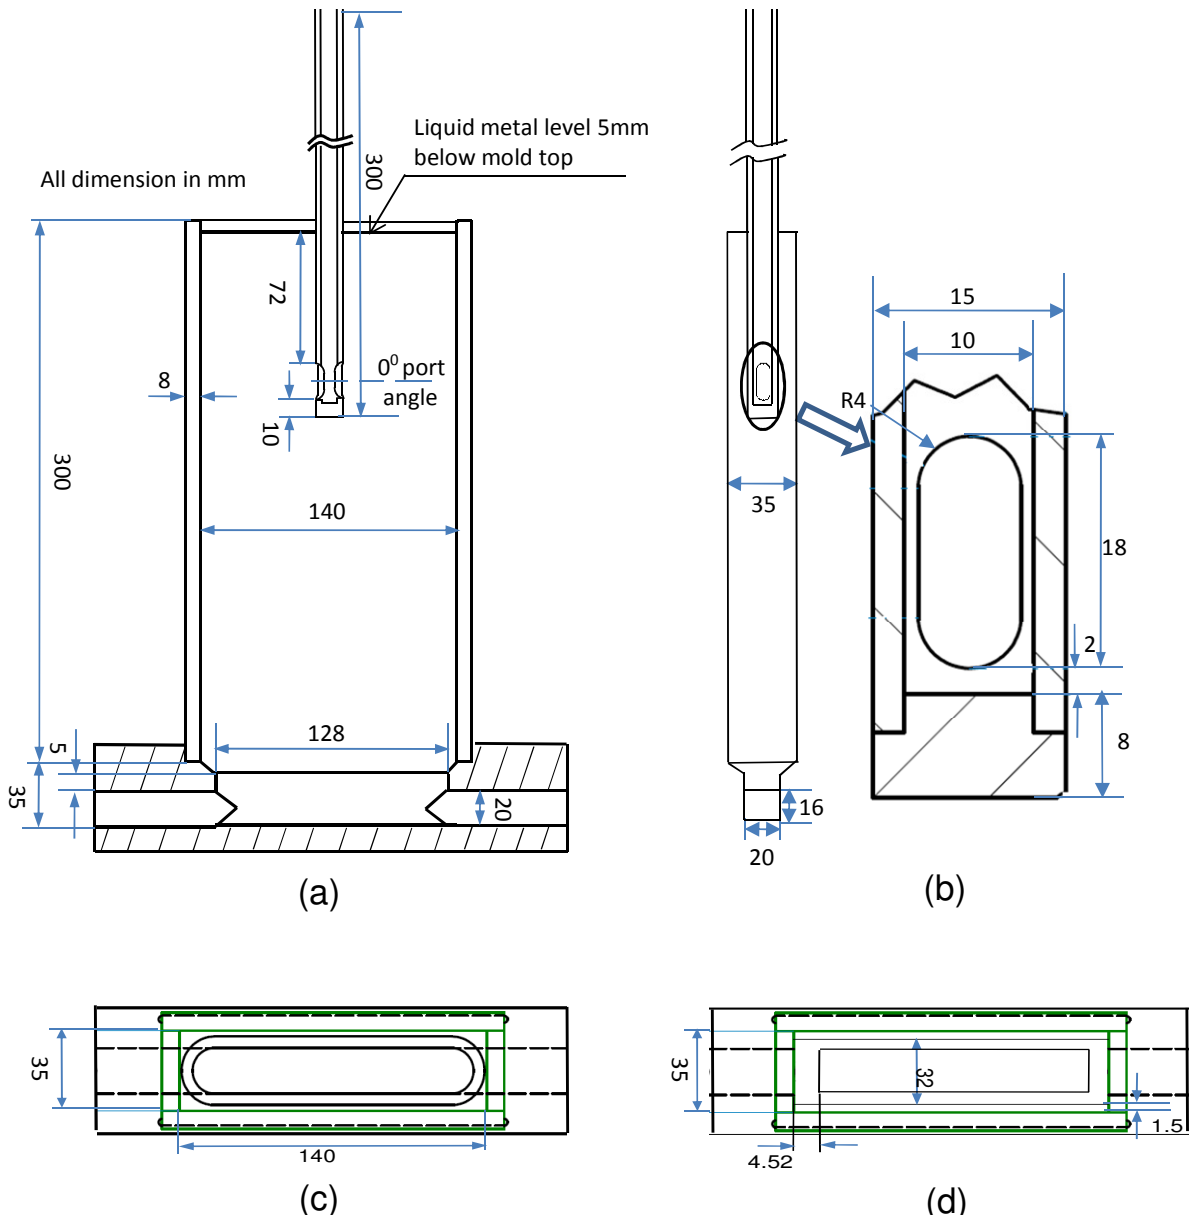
Geometry of GaInSn model of continuous casting [17-19] in mm (a) front view of the nozzle and mold apparatus (b) side view of the model domain with approximated bottom (c) bottom view of the apparatus (d) bottom view showing approximation of circular outlets with equal-area rectangles
